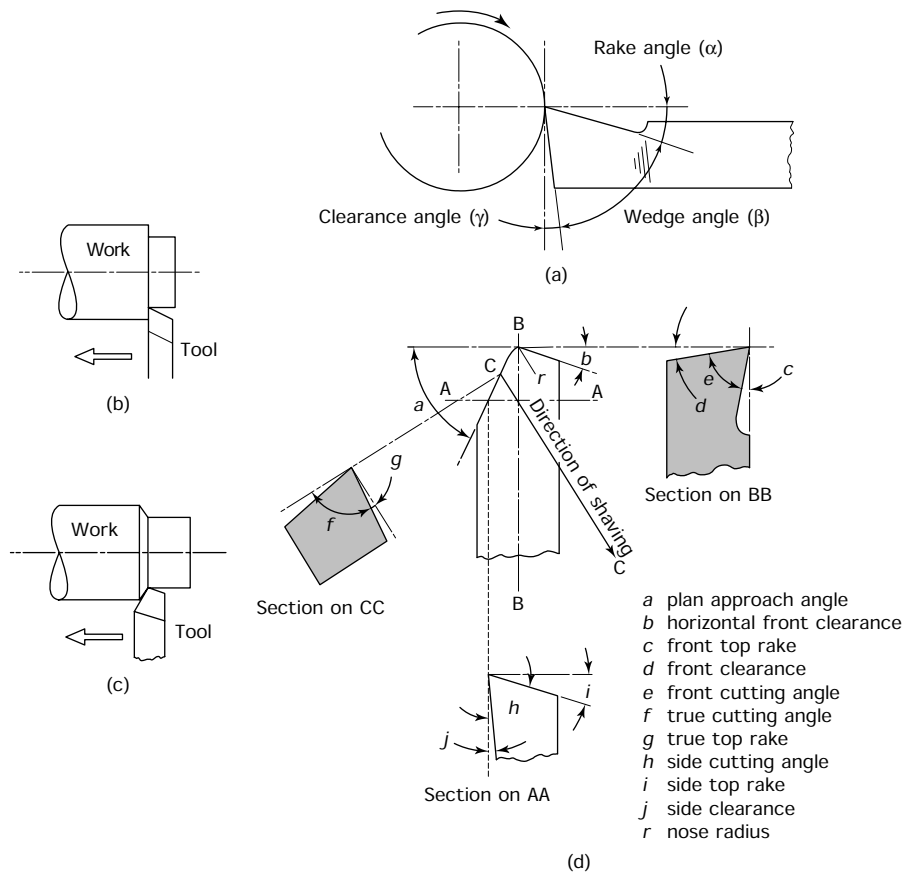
Lathe tool angles: (a) cutting applied to an orthogonal turning tool; (b) orthogonal cutting – the cutting edge is perpendicular to the direction of feed, this is useful for producing a square shoulder; (c) oblique cutting – the cutting edge is inclined to the direction of feed, this is the most efficient form for rapid metal removal; (d) cutting angles applied to an oblique turning tool
